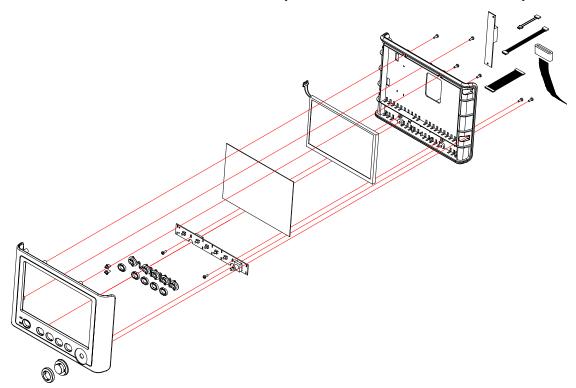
Front Case Disassembly - Front Case, LCD, Key Board
